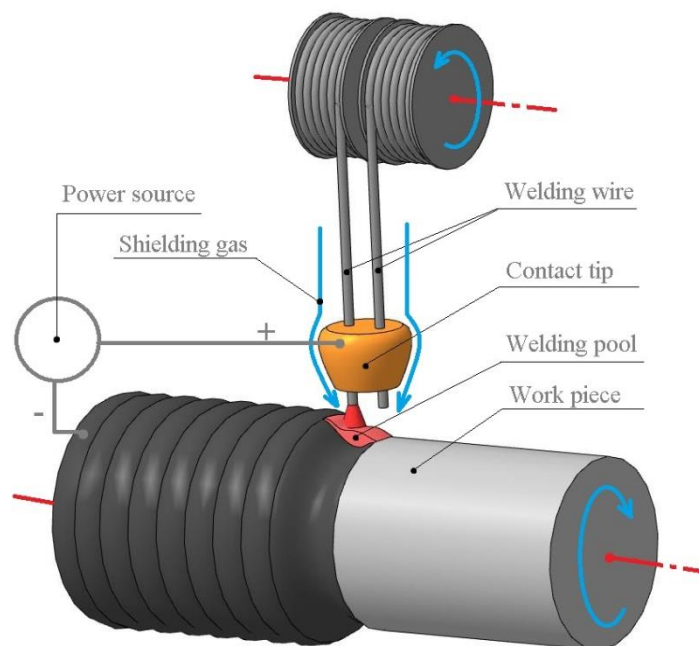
A schematic of the process of double-electrodecladding of a cylindrical workpiece.
